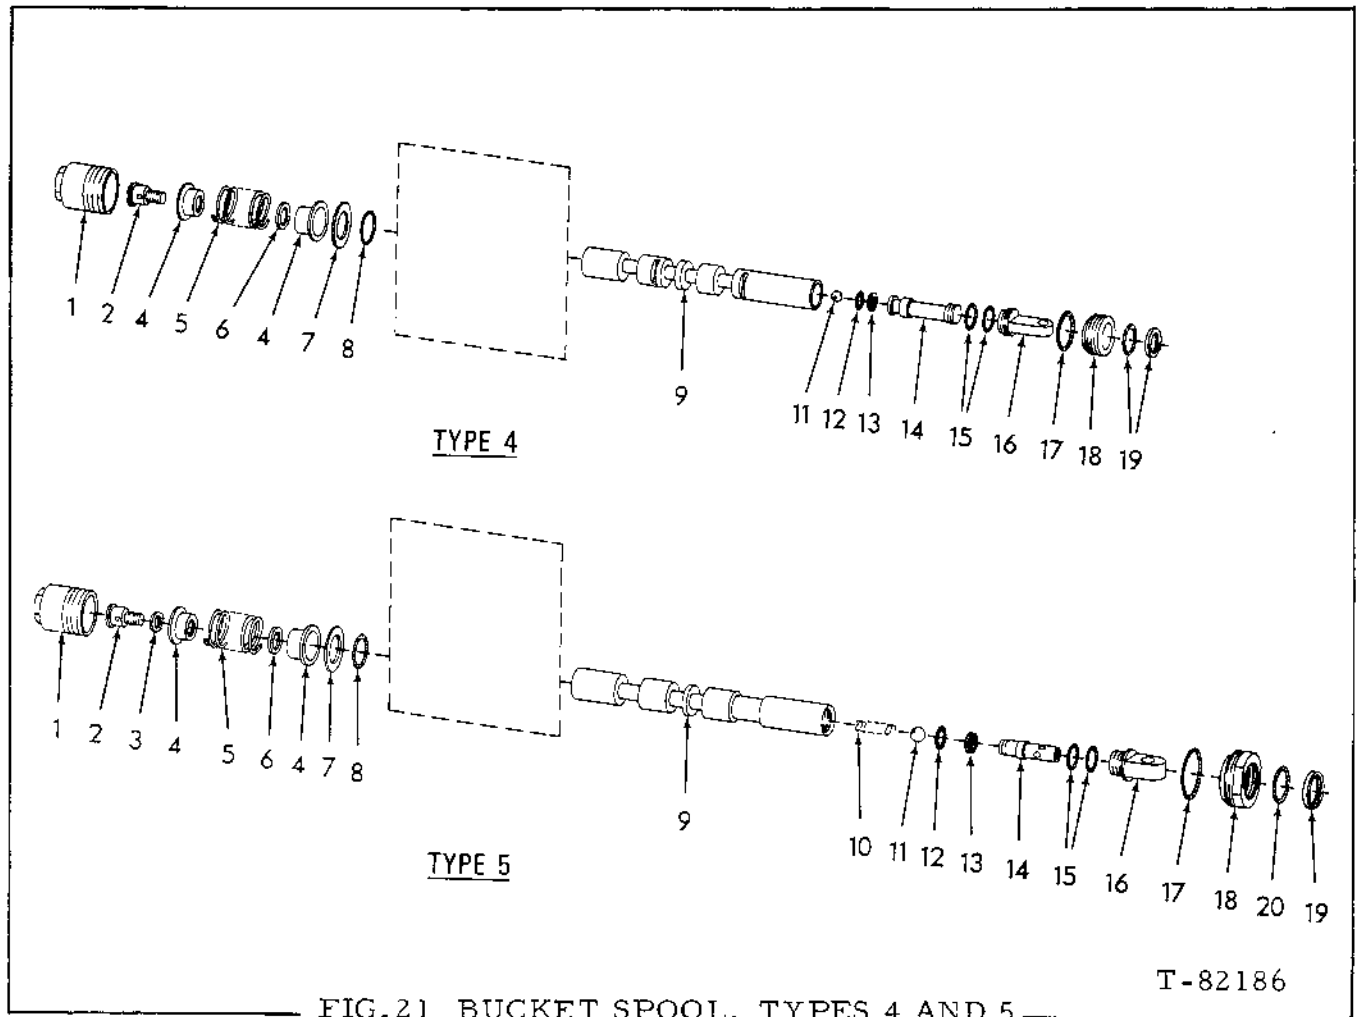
BUCKET SPOOL, TYPES 4 AND 5
